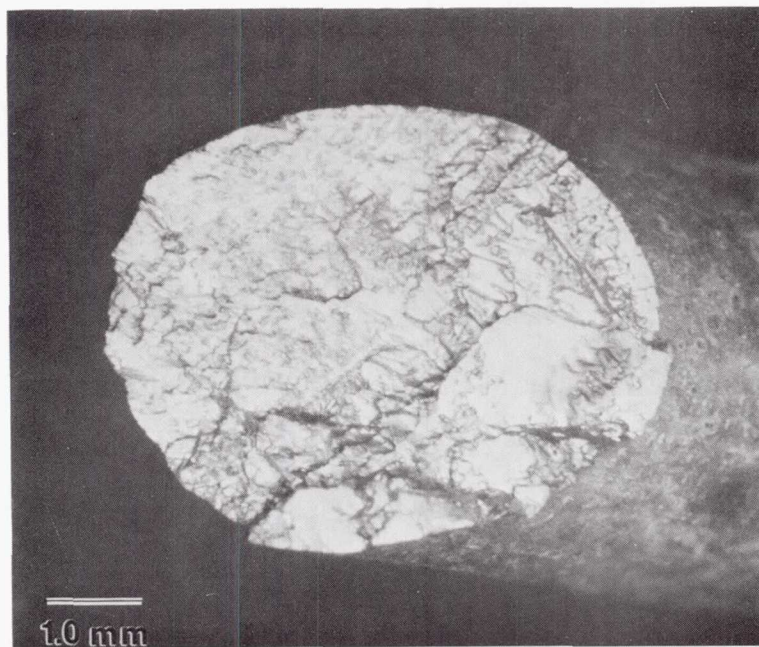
FRACTURE SURFACE OF A [111] LCF SPECIMEN, 1050 °C,
